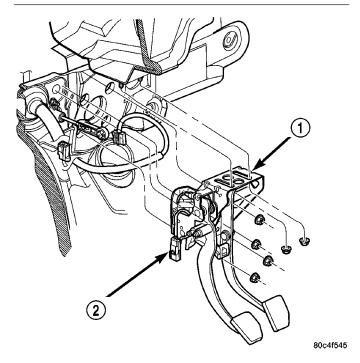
Brake/Clutch Pedal Assembly Removal/ Installation
